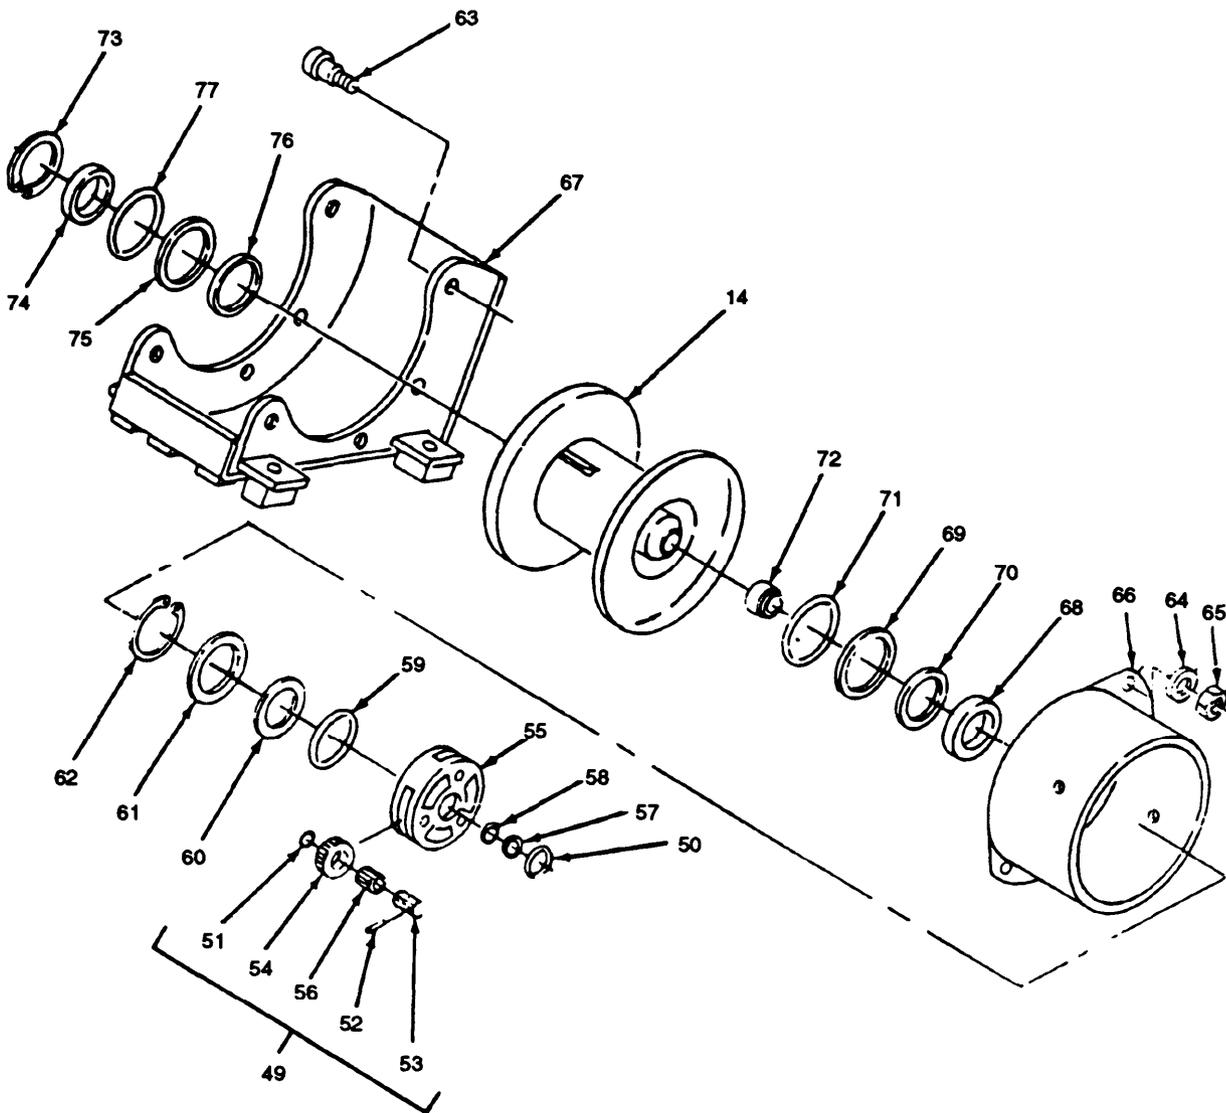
Winch Assembly Model 11-S-EC, Disassembly (Sheet 3 of 3).
